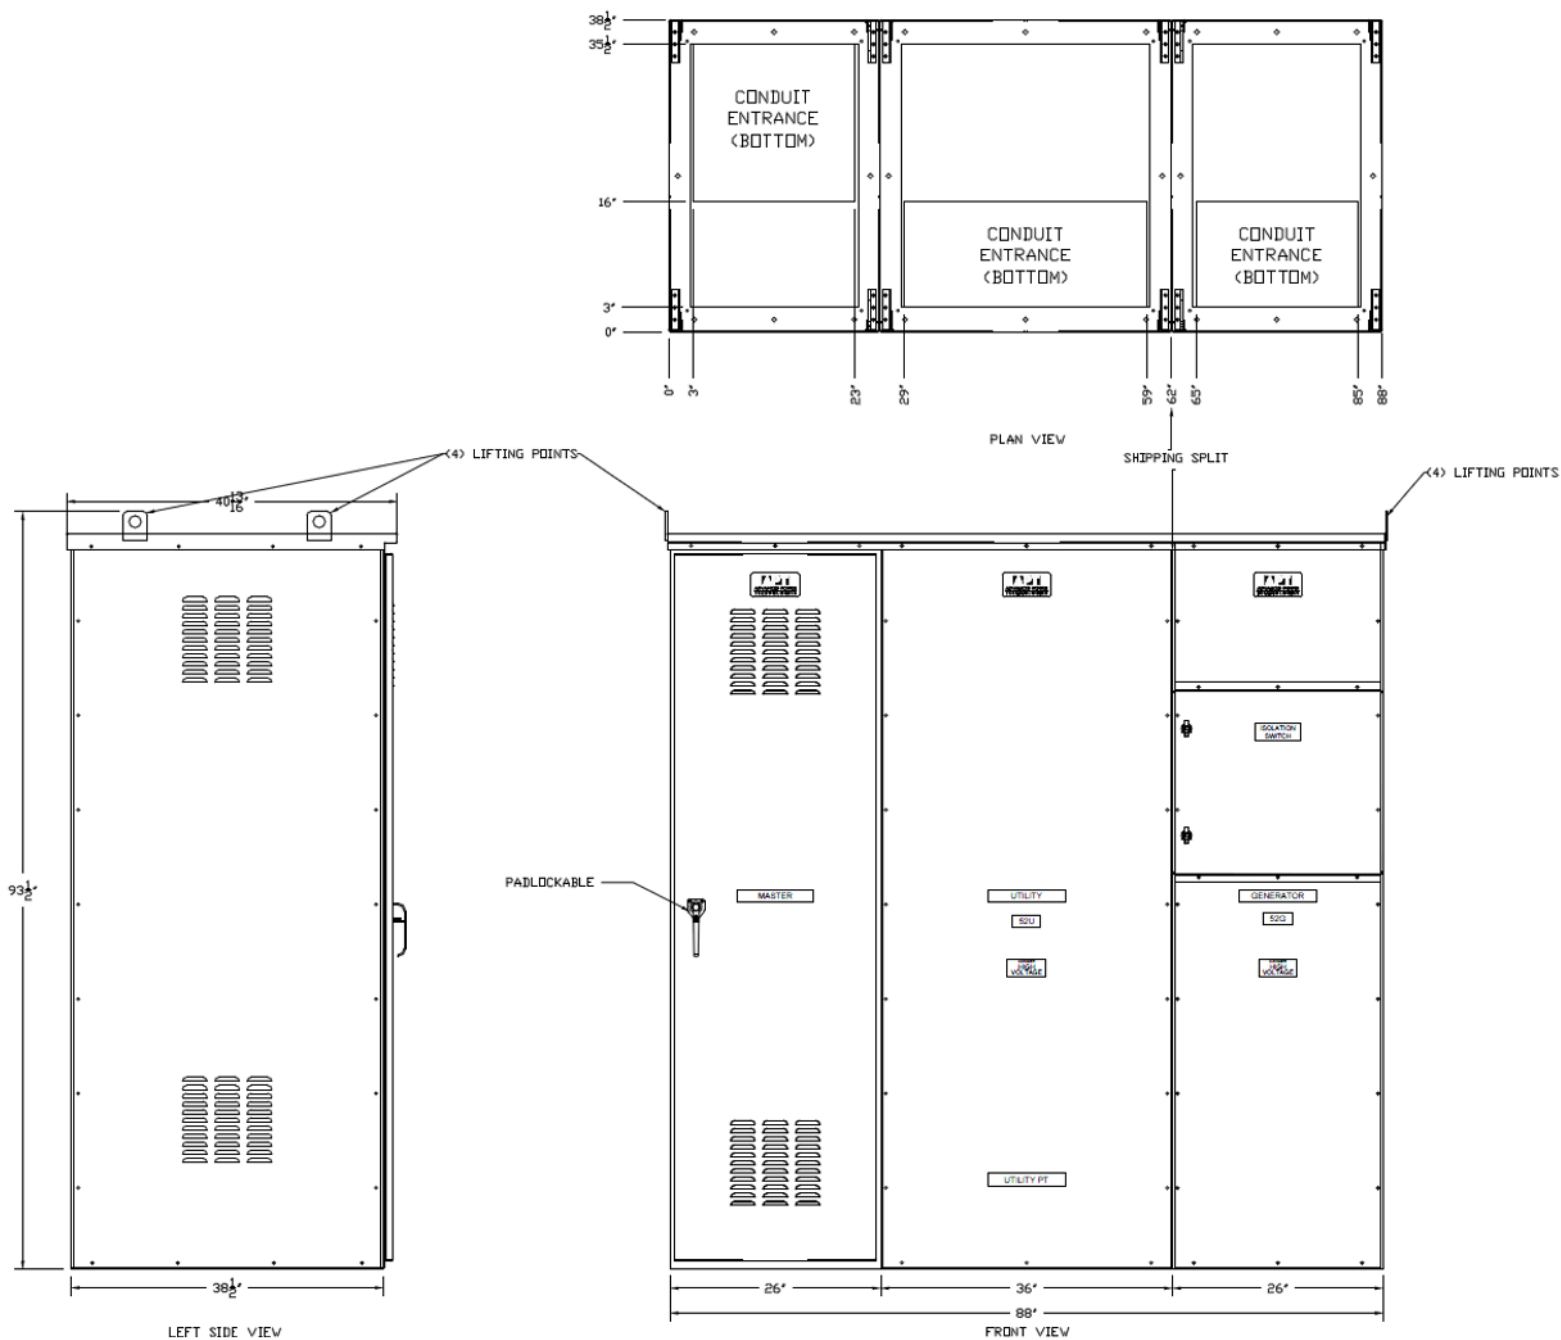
5-15 kV Metal-Enclosed Switchgear Front, Side, & Top Views – Dimensions
